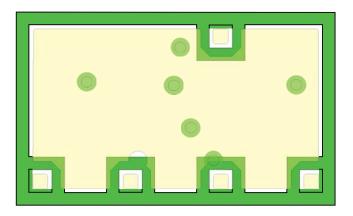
Solder Mask Superposed on ACFM-7107 Bottom Metal Pattern. (top view)
